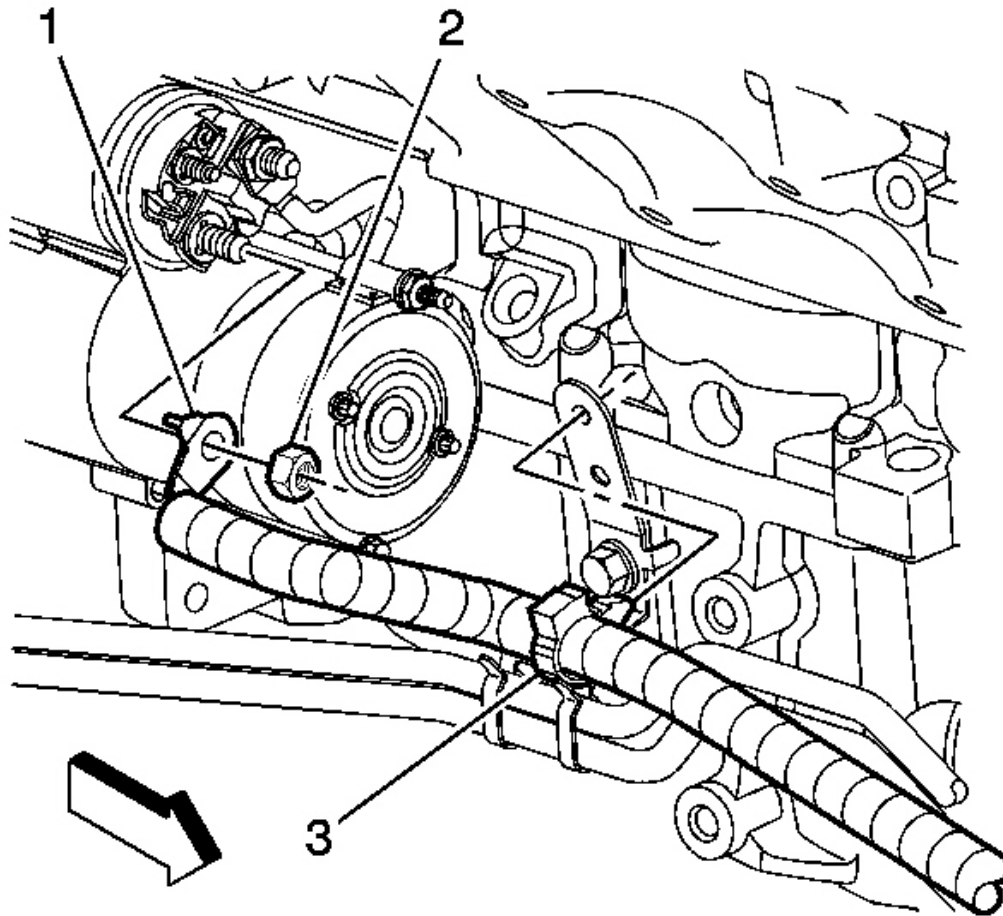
View Of Positive Cable Lead, Nut & Cable Clip
